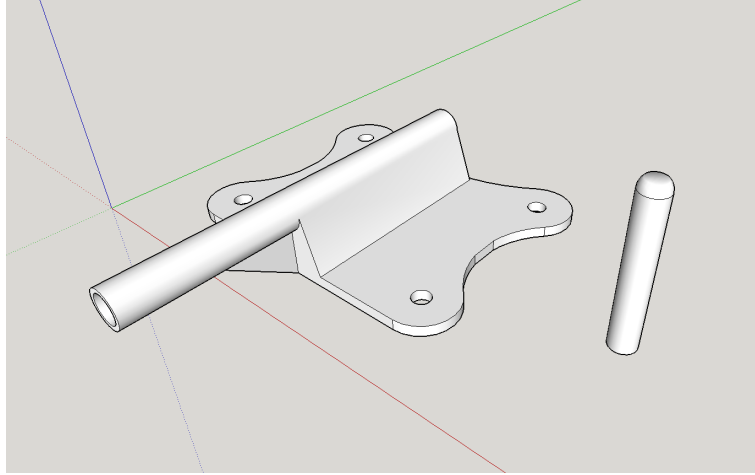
CAD design of the pushing tool. Metal spring is inserted inside to the cylinder and the stem on the right side of the image slides to the cylinder.
